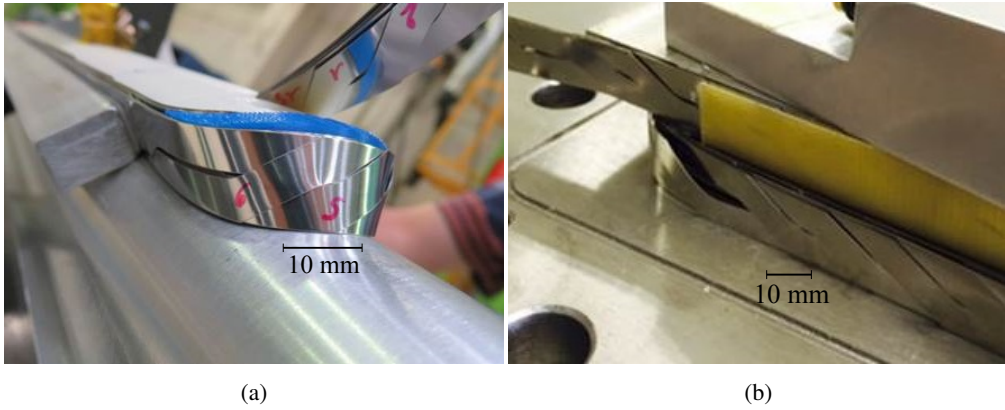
(a) Winding test using a stainless steel dummy cable of the cos-theta coil developed at CEA Saclay (picture by M. Durante). Two Roebel cross-overs are seen touching due to strand shift. (b) Similar effect observed in aligned block dummy winding at CERN (picture from G. Kirby). Errors in transposition length and strand shift have caused a “pop-up” of one of the strands.
